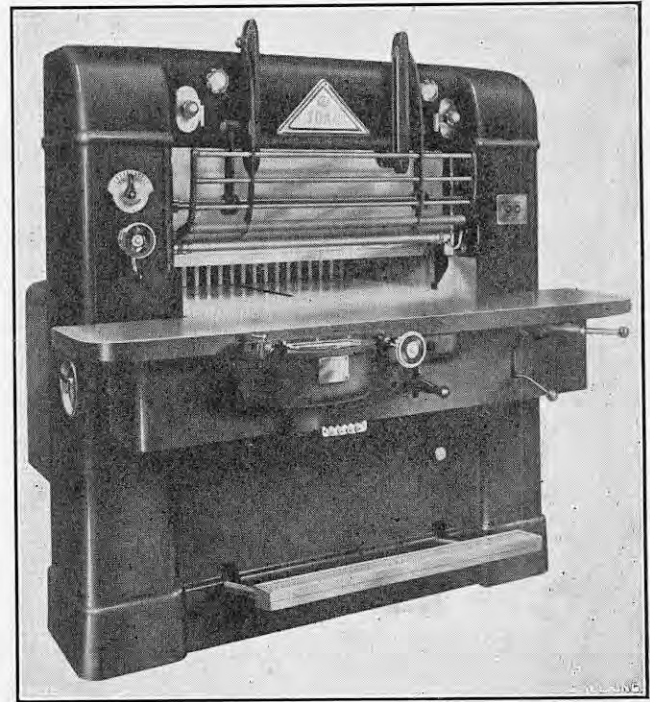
42-IN. GUILLOTINE; SOAG MACHINERY COMPANY.
